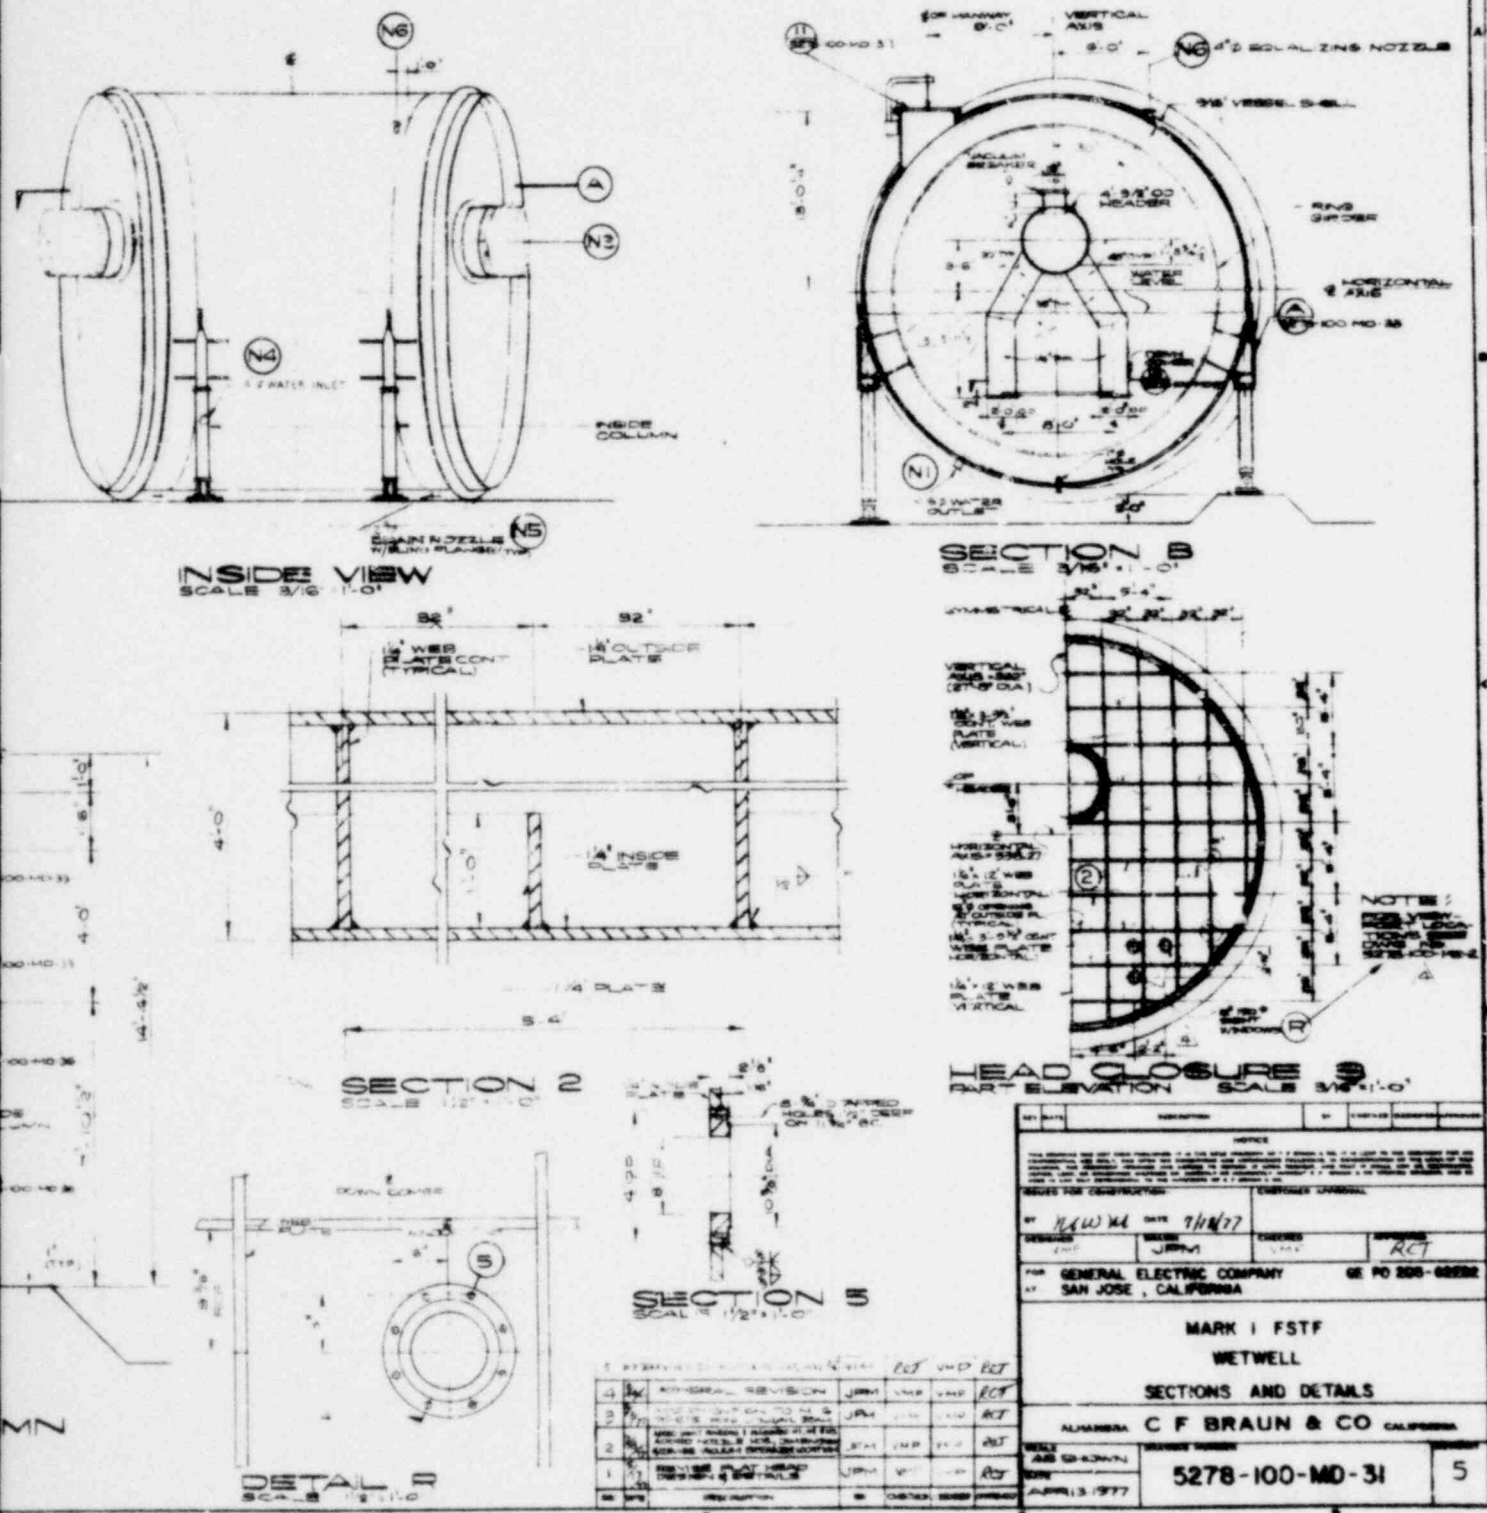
Mark I FSTF Wetwell-Sections and Details-View 1
